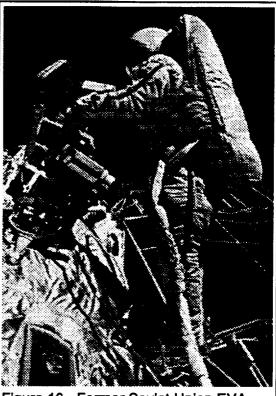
Former Soviet Union EVA Manual Welding Experiment
